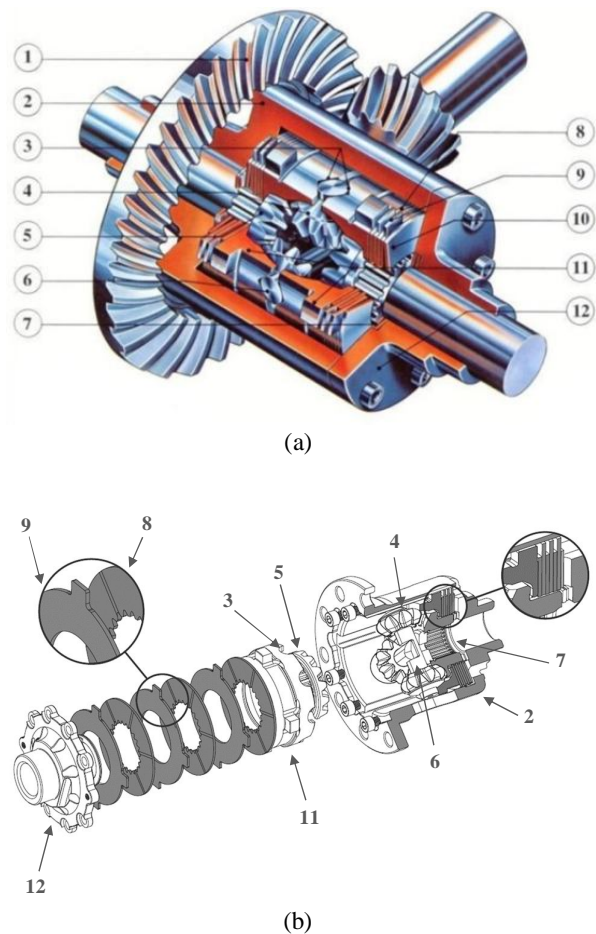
The torque-sensitive ramp differential: internal parts (courtesy ZF [63] and KMP [64]). 1) final drive: crown&pinion, 2) differential carrier, 3) ramp pair on side gear rings (4 at  $90^\circ$ ), 4) satellite bevel gears (spider gears), 5) driven bevel gears, 6) satellite gear pin, 7) spline gear, output shaft, 8) clutch disks coupled with output shaft, 9) clutch disks coupled with diff carrier, 10) Belleville spring for axial preload, 11) side gear pressure rings, 12) diff housing cover.
